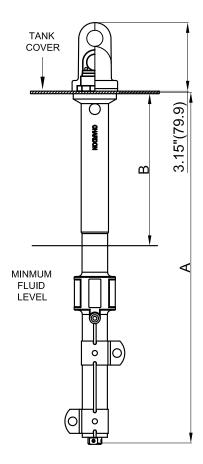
Installation view of the Cover Mount Bayonet Fuse Holder.
